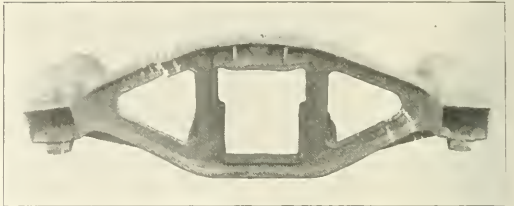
Book A, Test 9, Side Frame Broken Through Weld. Breaking Load, 149,600 Lb.
